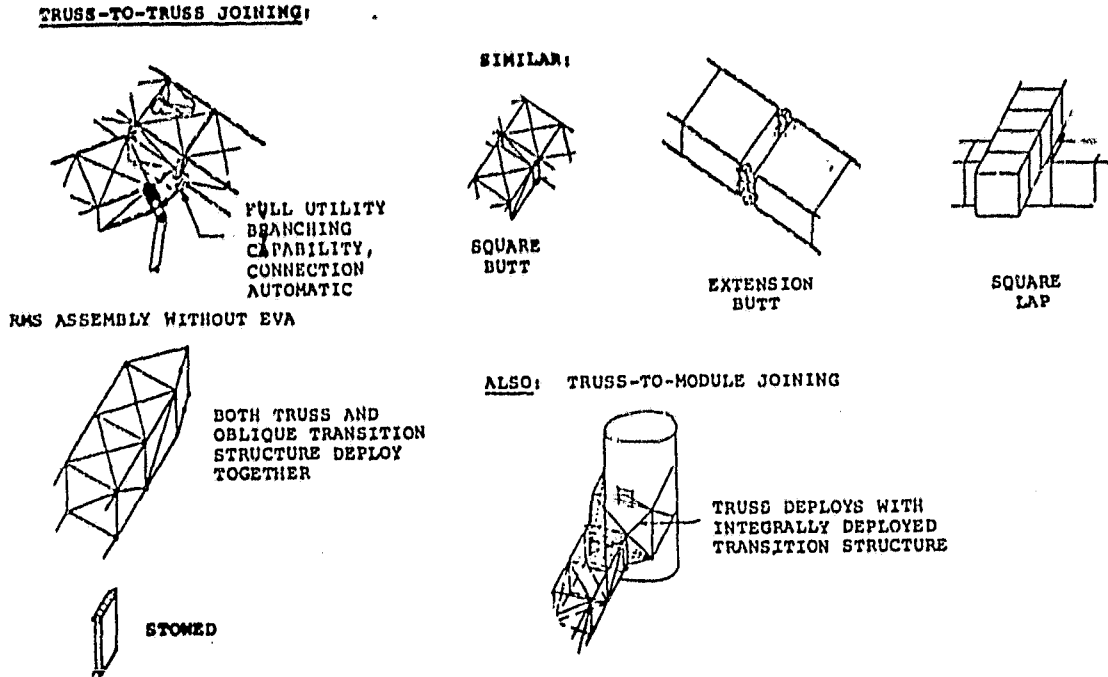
MODULE DEPLOYMENT ASSEMBLY WITH BADF
